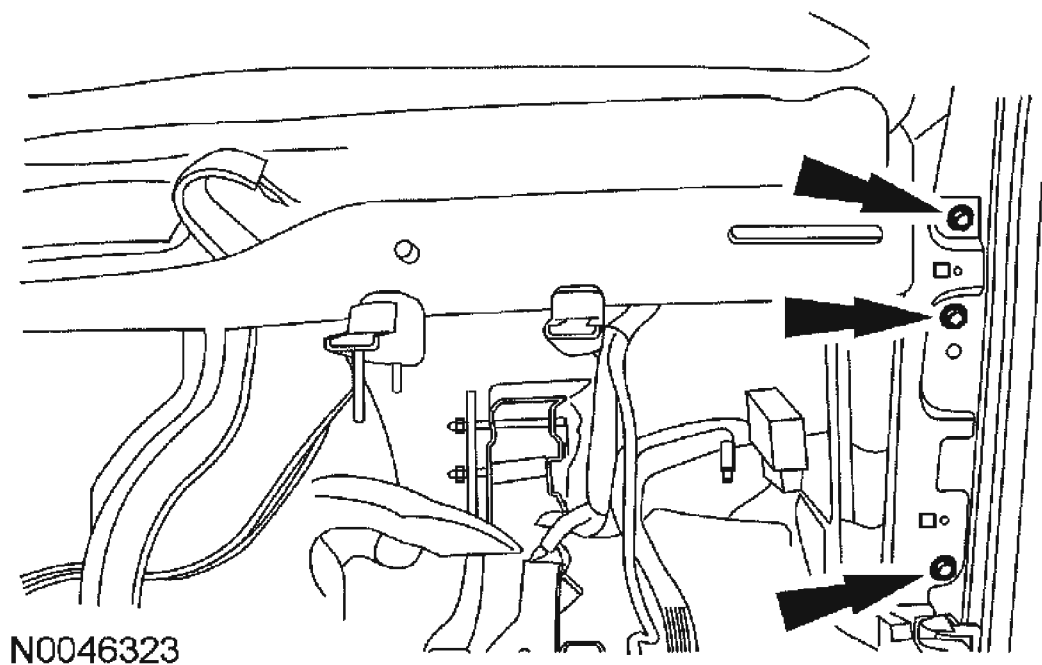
Removing RH In-Vehicle Crossbeam Bolts
